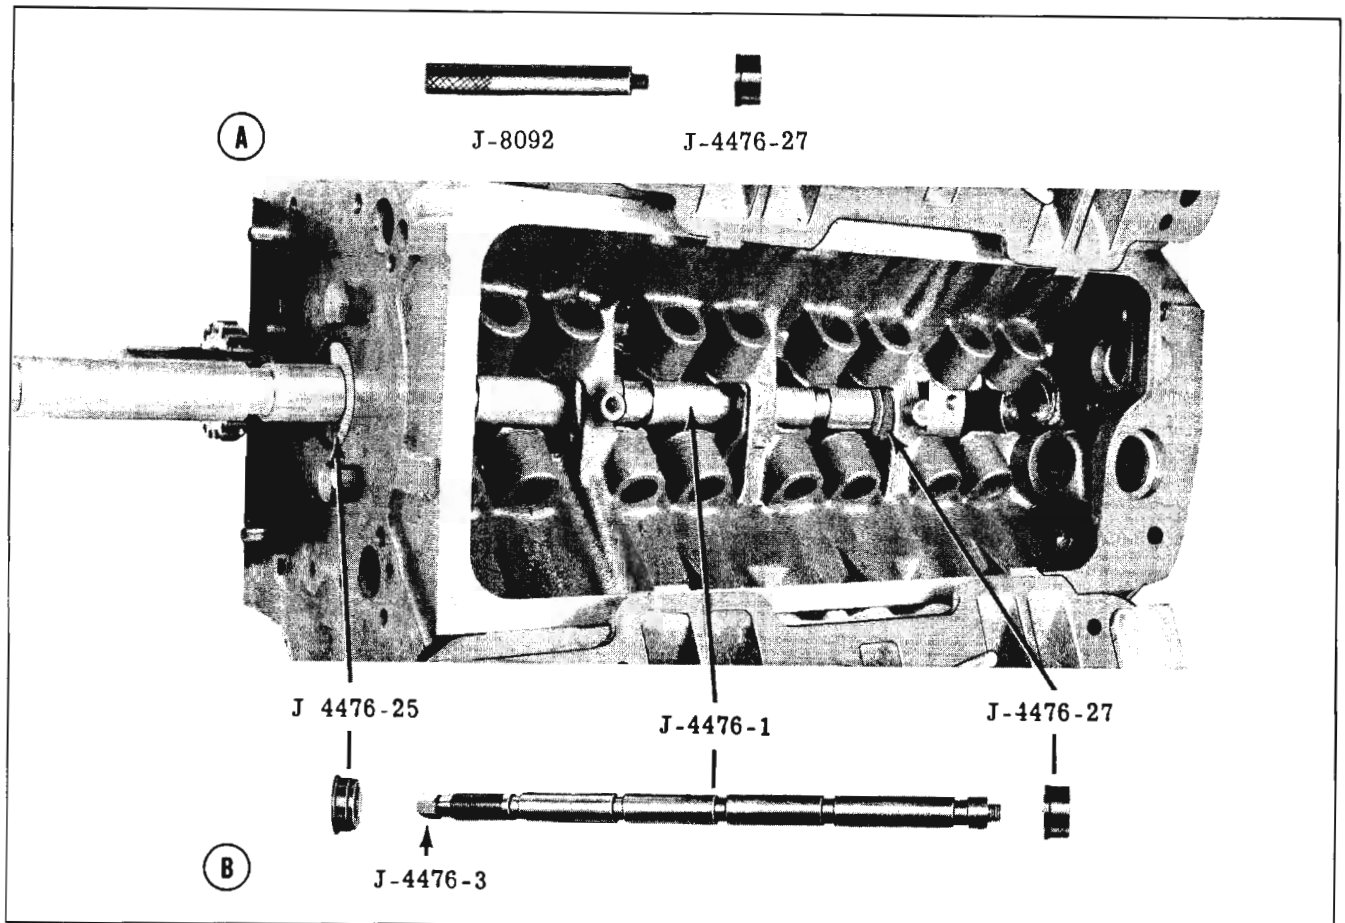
Removing No. 4 Camshaft Bearing (Typical of 1, 2 & 3)
